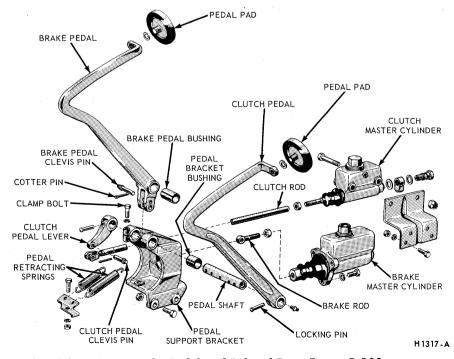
P-Series Brake Pedal and Related Parts Except P-100
